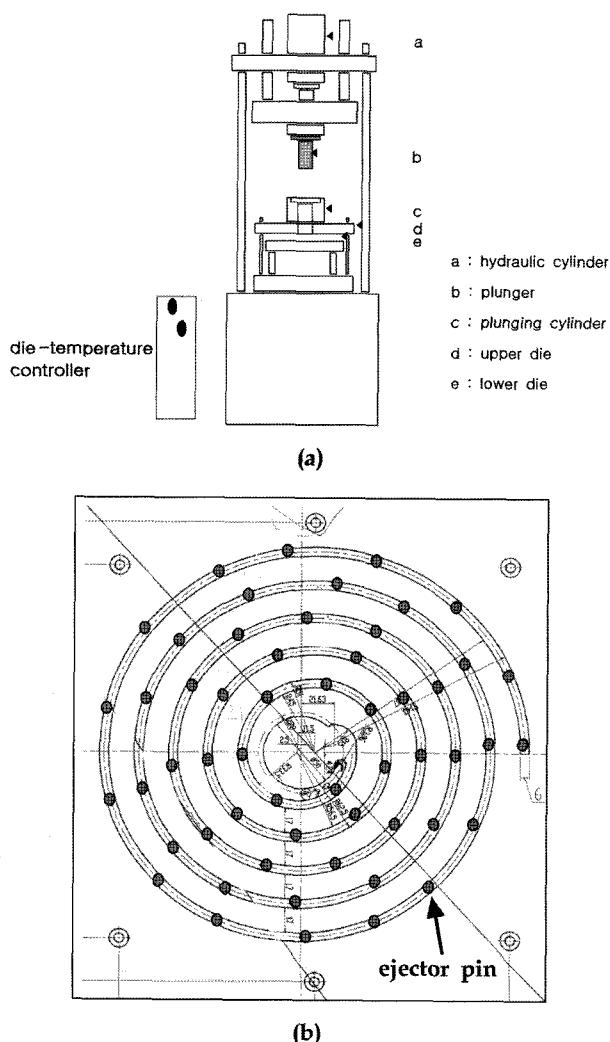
Squeeze casting machine, (a), and permanent mold for fluidity test, (b).
